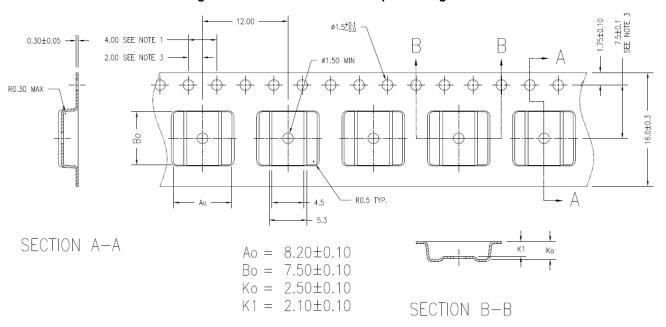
20-Pin SSOP Carrier Tape Drawing
